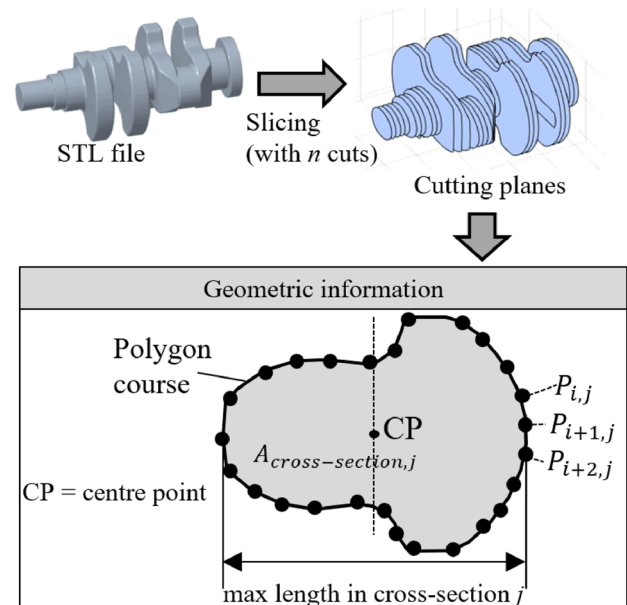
Slicing a 2-cylinder crankshaft to obtain cross-sectional information
